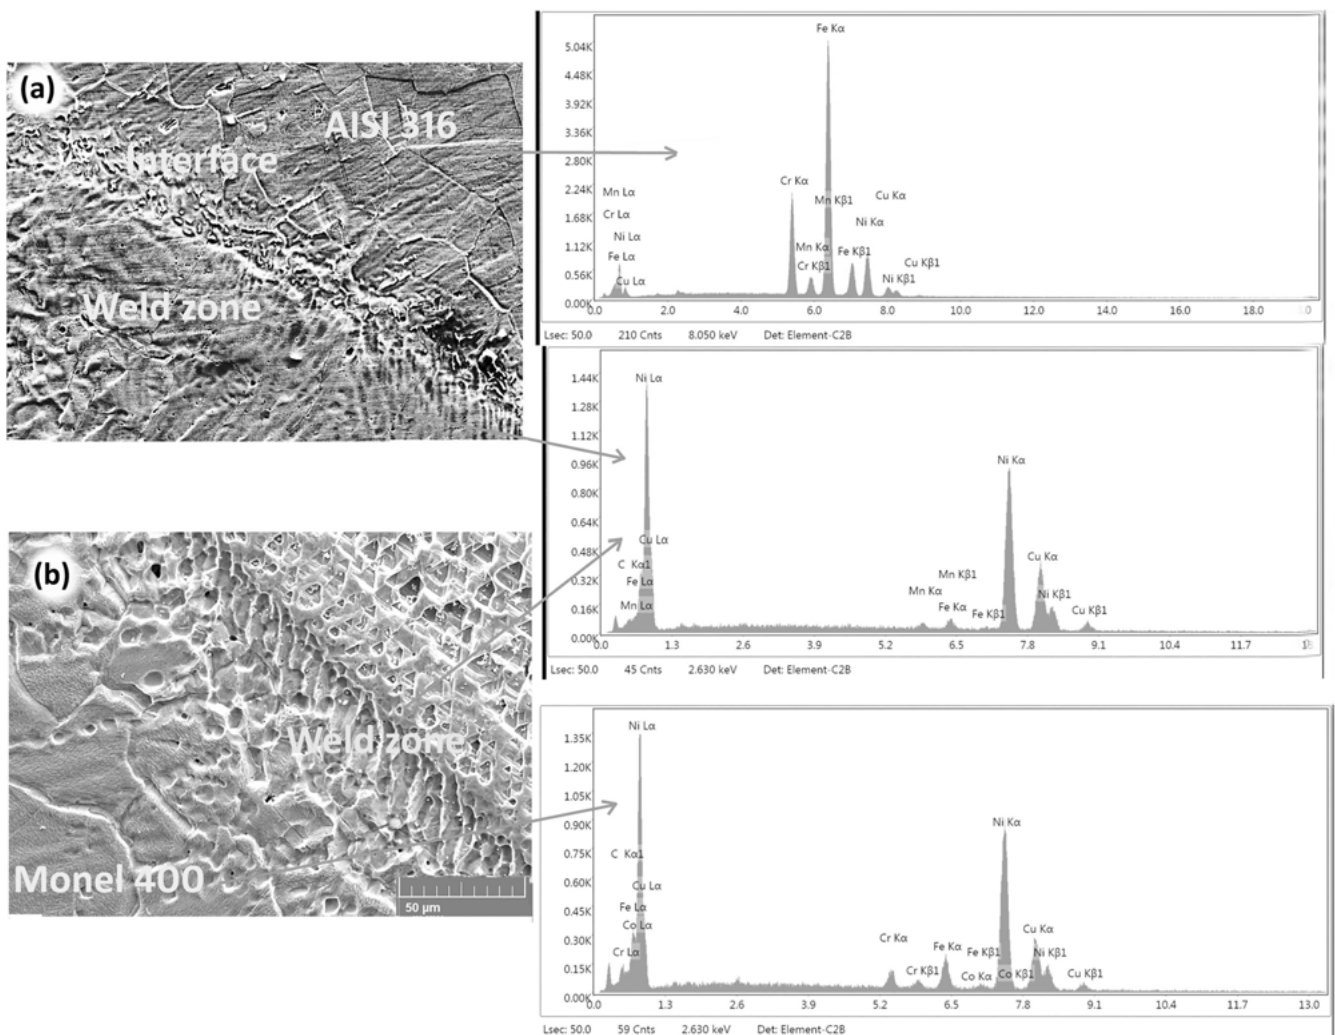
SEM/EDS X-ray point analysis of dissimilar pulsed TIG weldment: (a) AISI 316, (b) Monel 400.
